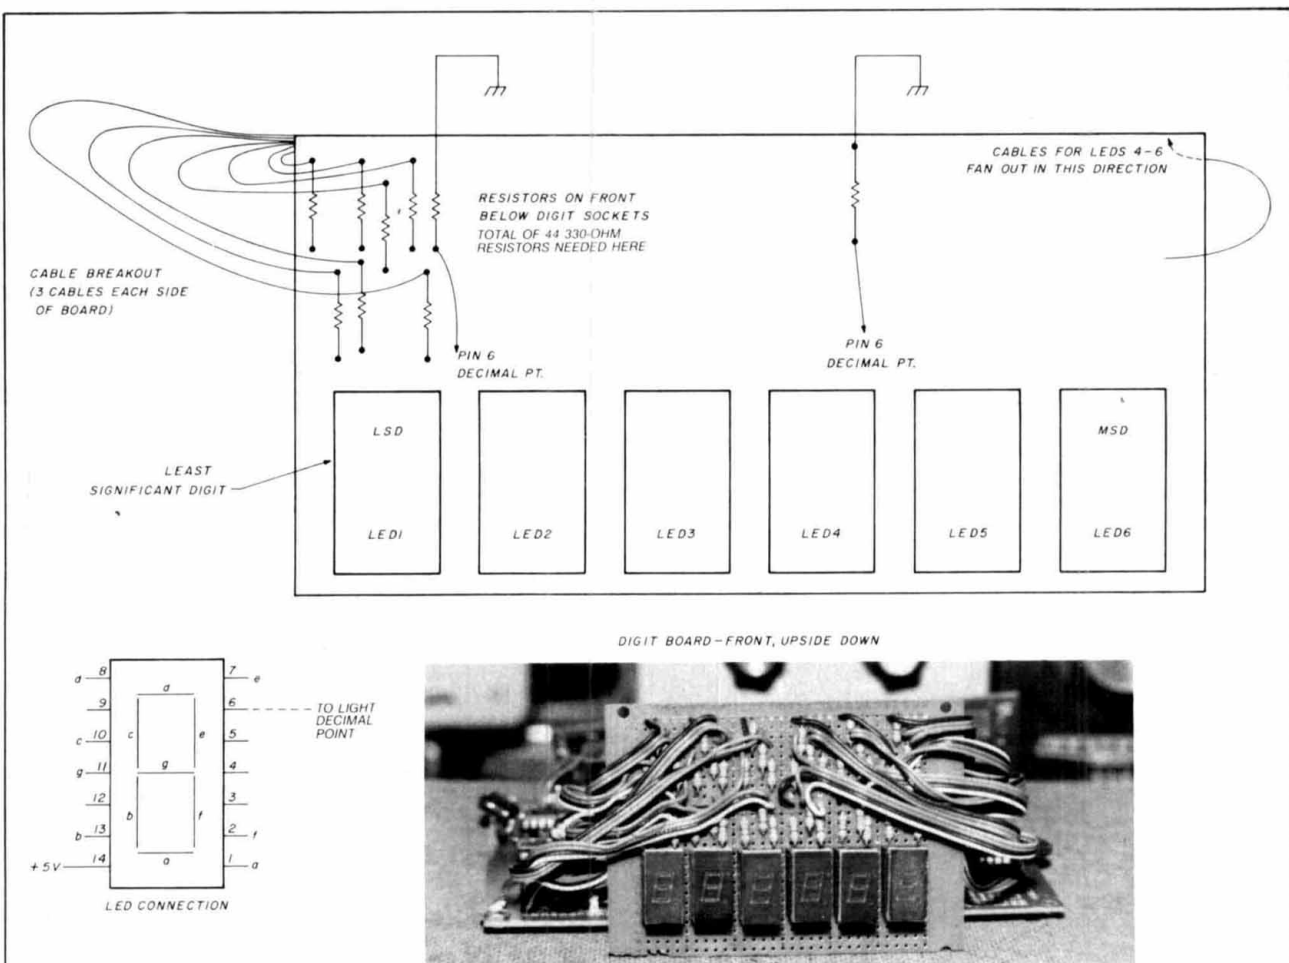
Digit board. Outputs of decoder/drivers are cabled to their respective segment dropping resistors. One cable section per digit goes to corresponding decoder on bottom board. Seven 330-ohm resistors per digit — except for LEDs No. 1 and No. 4, which have a resistor going from pin 6 to ground.
